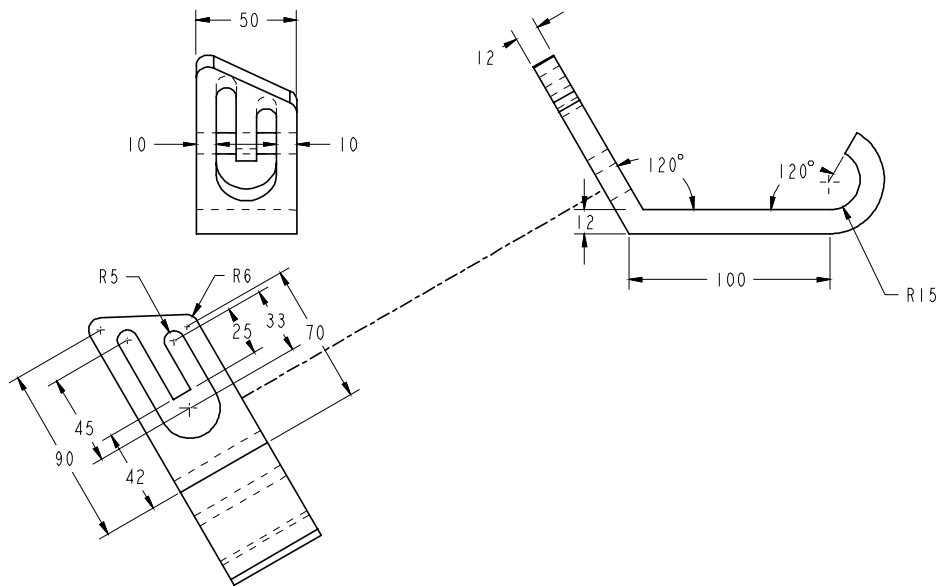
Left-side view, auxiliary view, and front view of the model
